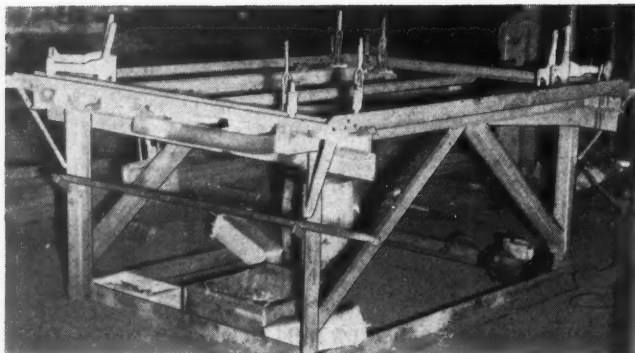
View of Fitting and Tack Welding Jig Designed for Welding Door Frames.
